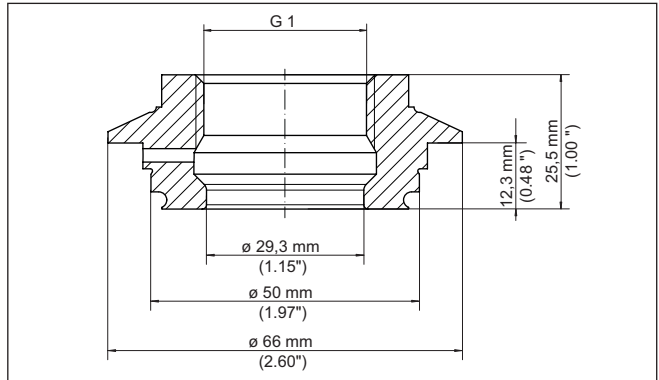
Dimensions hygienic adapter G1 (DIN 3852-X) on Varivent Form F DN 25 - O-ring seal
